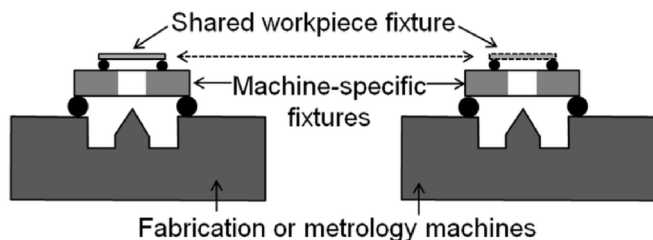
Material handling scheme wherein the same workpiece fixture can be registered to multiple machines through intermediate machine-specific fixtures. In our scheme, kinematic couplings are used to register the workpiece fixture to the intermediate machine-specific fixtures.
